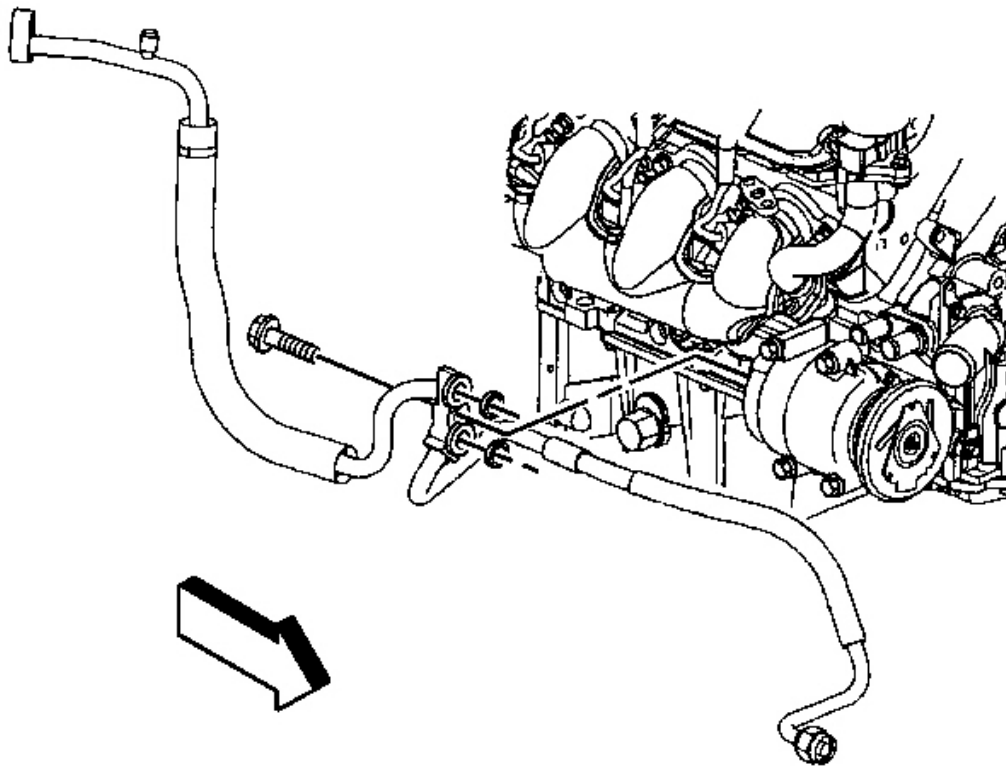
A/C Compressor & Condenser Hose & Bolt
